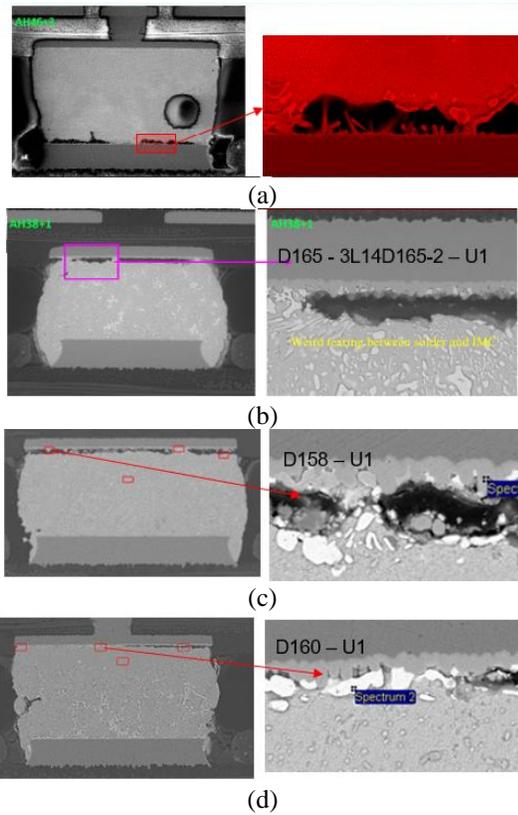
THM solder joints formed when using JRF Resin solder pastes. Voiding is clearly visible
